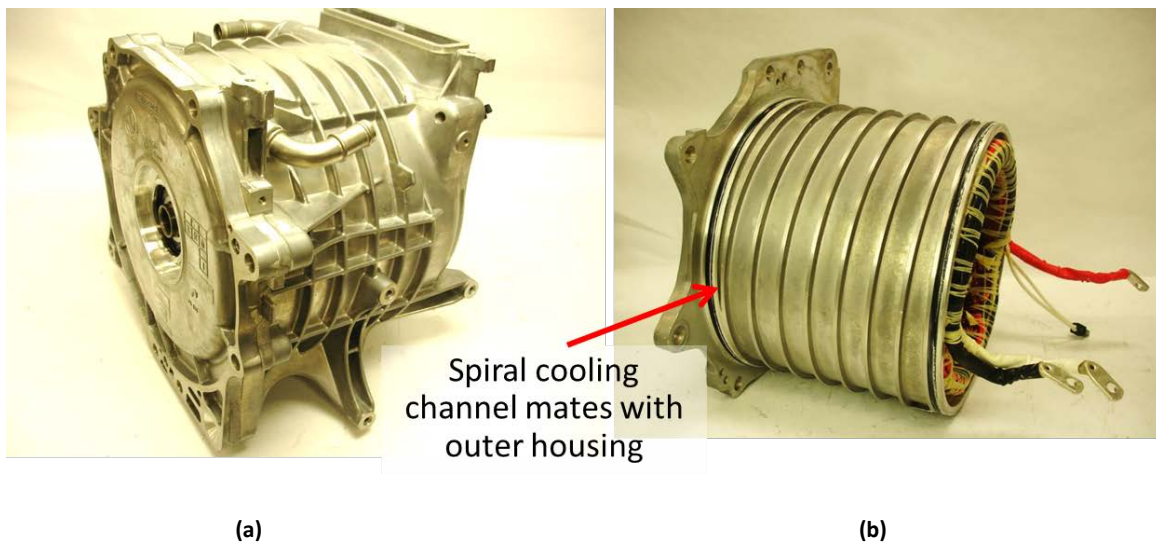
2016 BMW i3 motor assembly (a) and motor assembly with outer case removed (b).
